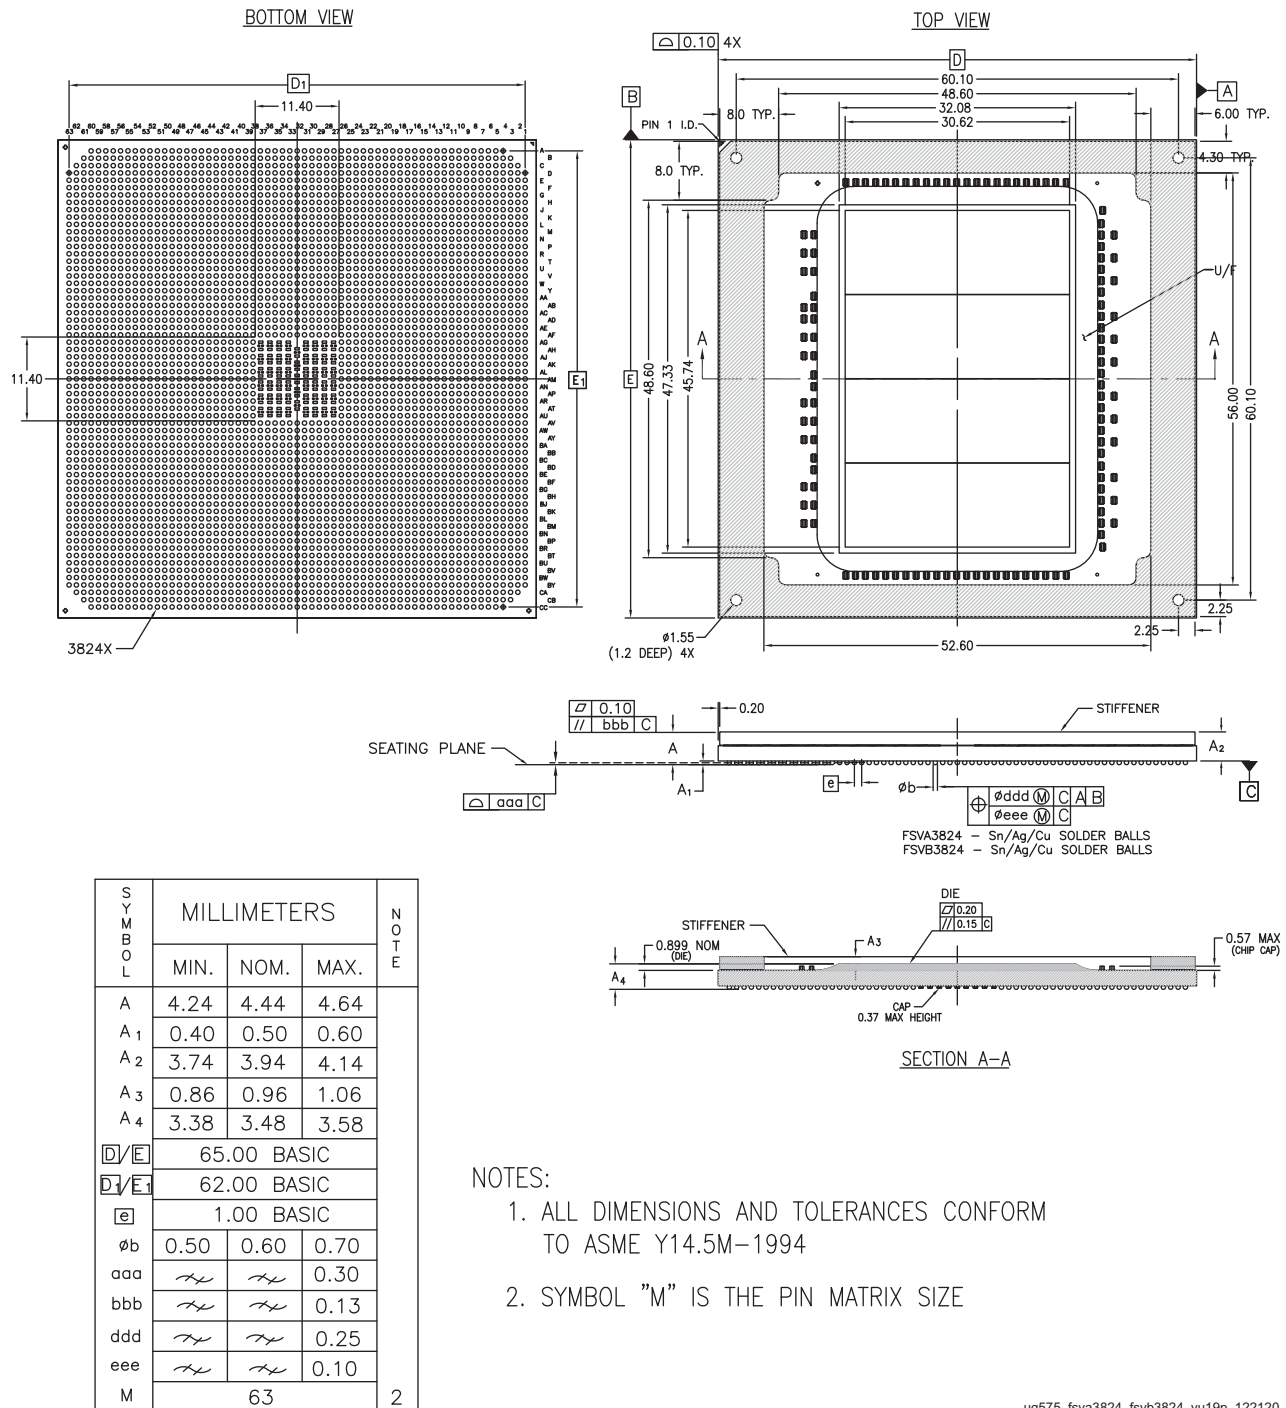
Package Dimensions for FSVA3824 and FSVB3824 (XCVU19P)
